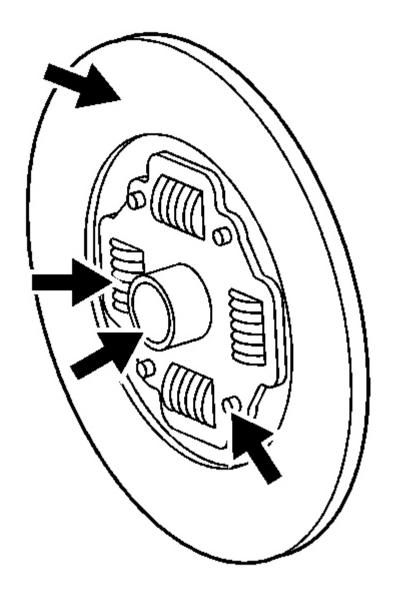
Inspecting The Clutch Disc For Damage Courtesy of GENERAL MOTORS CORP.
